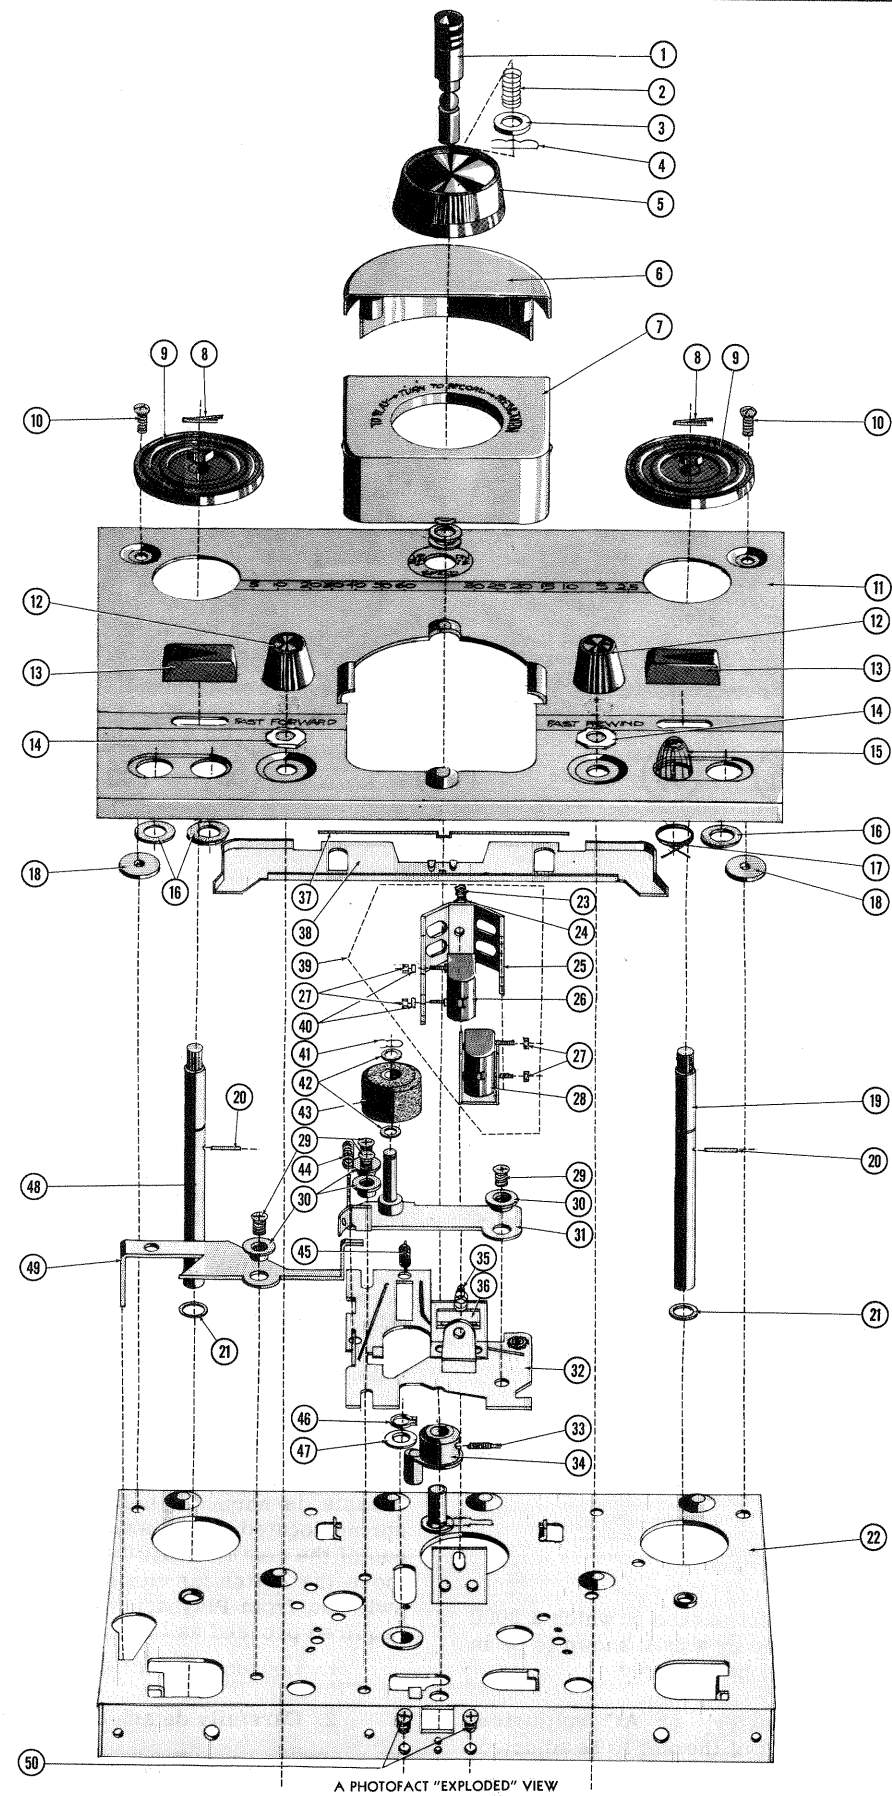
A. EXPLODED VIEW OF PARTS ABOVE BASEPLATE.
